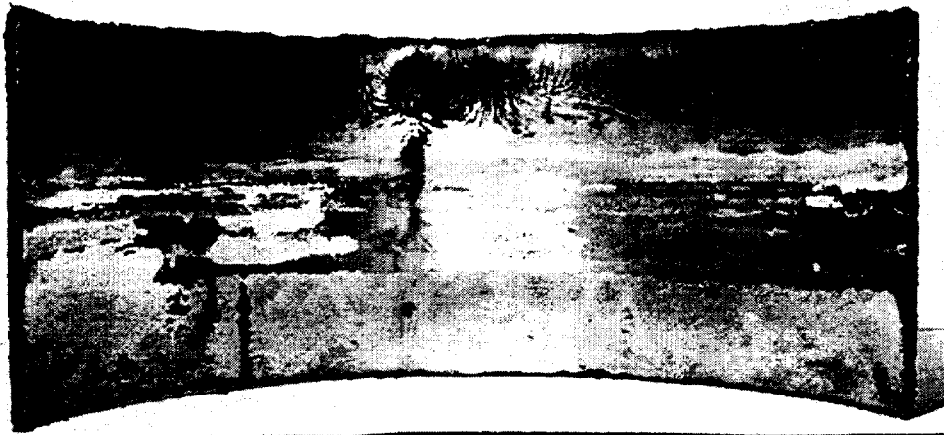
Stress Corrosion Cracking of a 304L Stainless Steel Heat Exchanger
